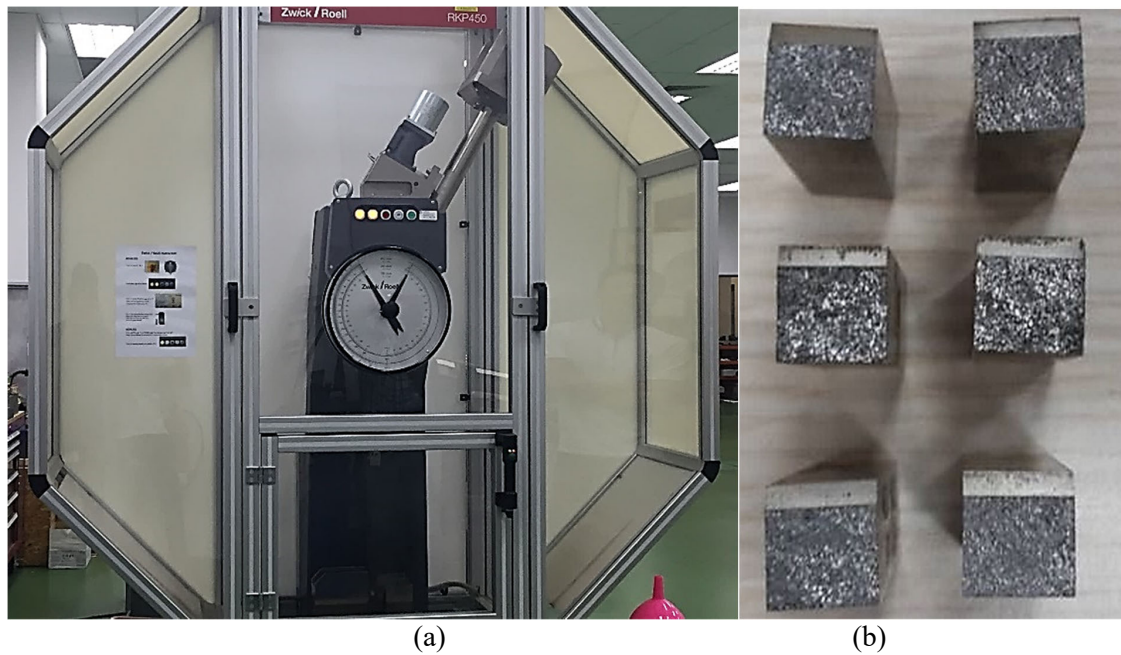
Charpy test: (a) test machine and setup, (b) fractured specimen
